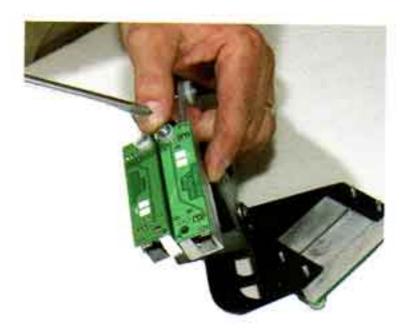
& 4h: There are four identical slider switch PC boards and cast metal holders. These assemblies attach to the control panel and will control the computer ECU on the air unit. Attach two of the assemblies to the new slider switch bracket. Make certain the loop ends of the new control levers engage the levers on the slider switches. If the levers drag on the sides of the metal holders, slightly bend the levers in or out until proper clearance is achieved. Secure the assemblies with the #8 x 1-1/4" self-tapping screws and nylon cupped washers. Tighten the screws until they are just barely snug. Do not over tighten or the PC boards may be damaged.
